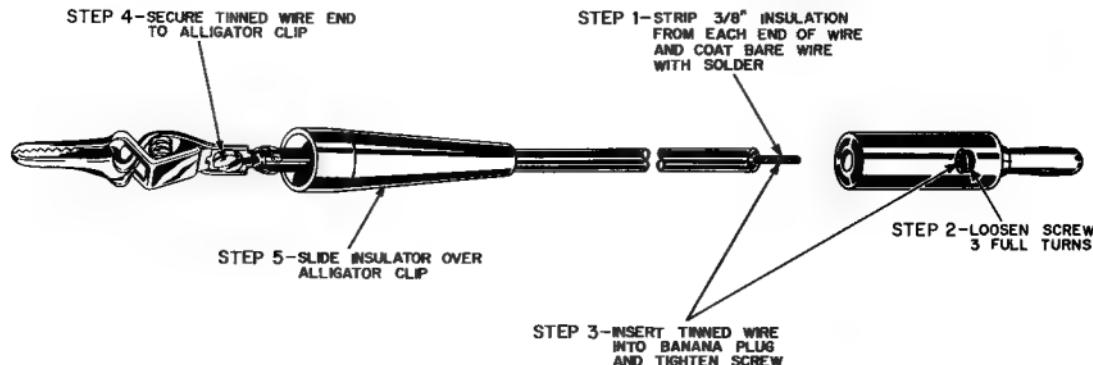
HOW TO ASSEMBLE THE TEST LEADS
